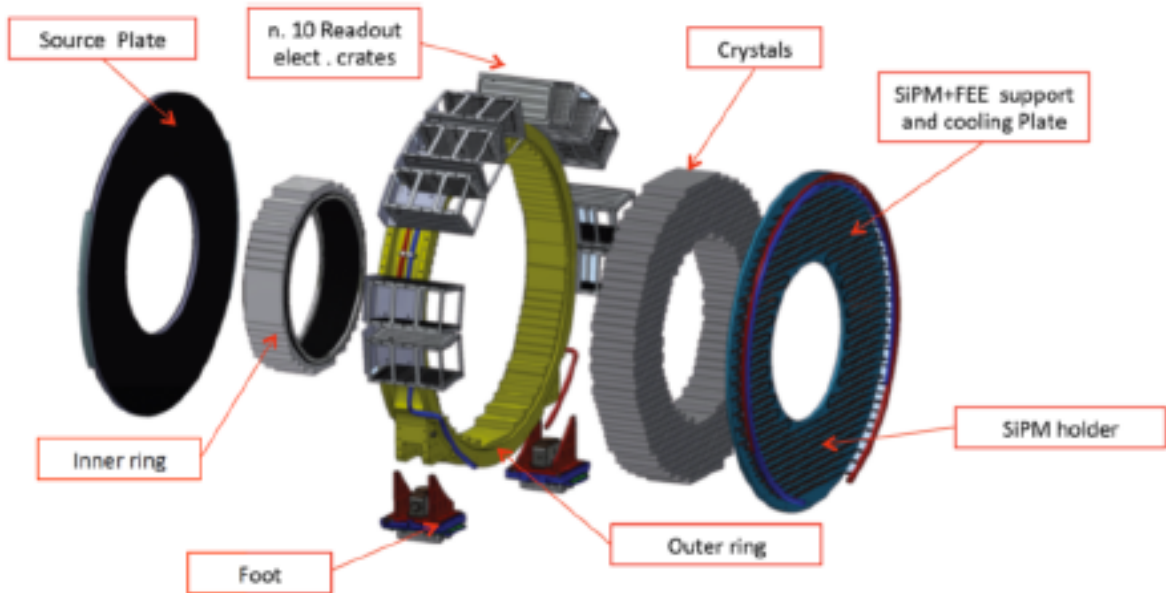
Exploded CAD model of one disk of the Mu2e electromagnetic calorimeter.
